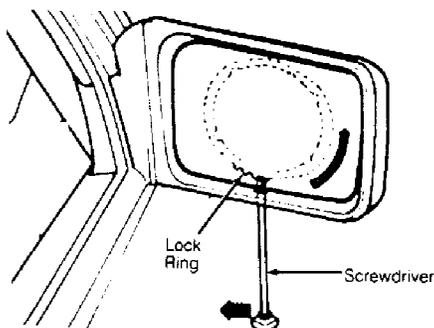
Removing Mirror Glass (Golf GL, GTI, Jetta & Jetta GLi)
